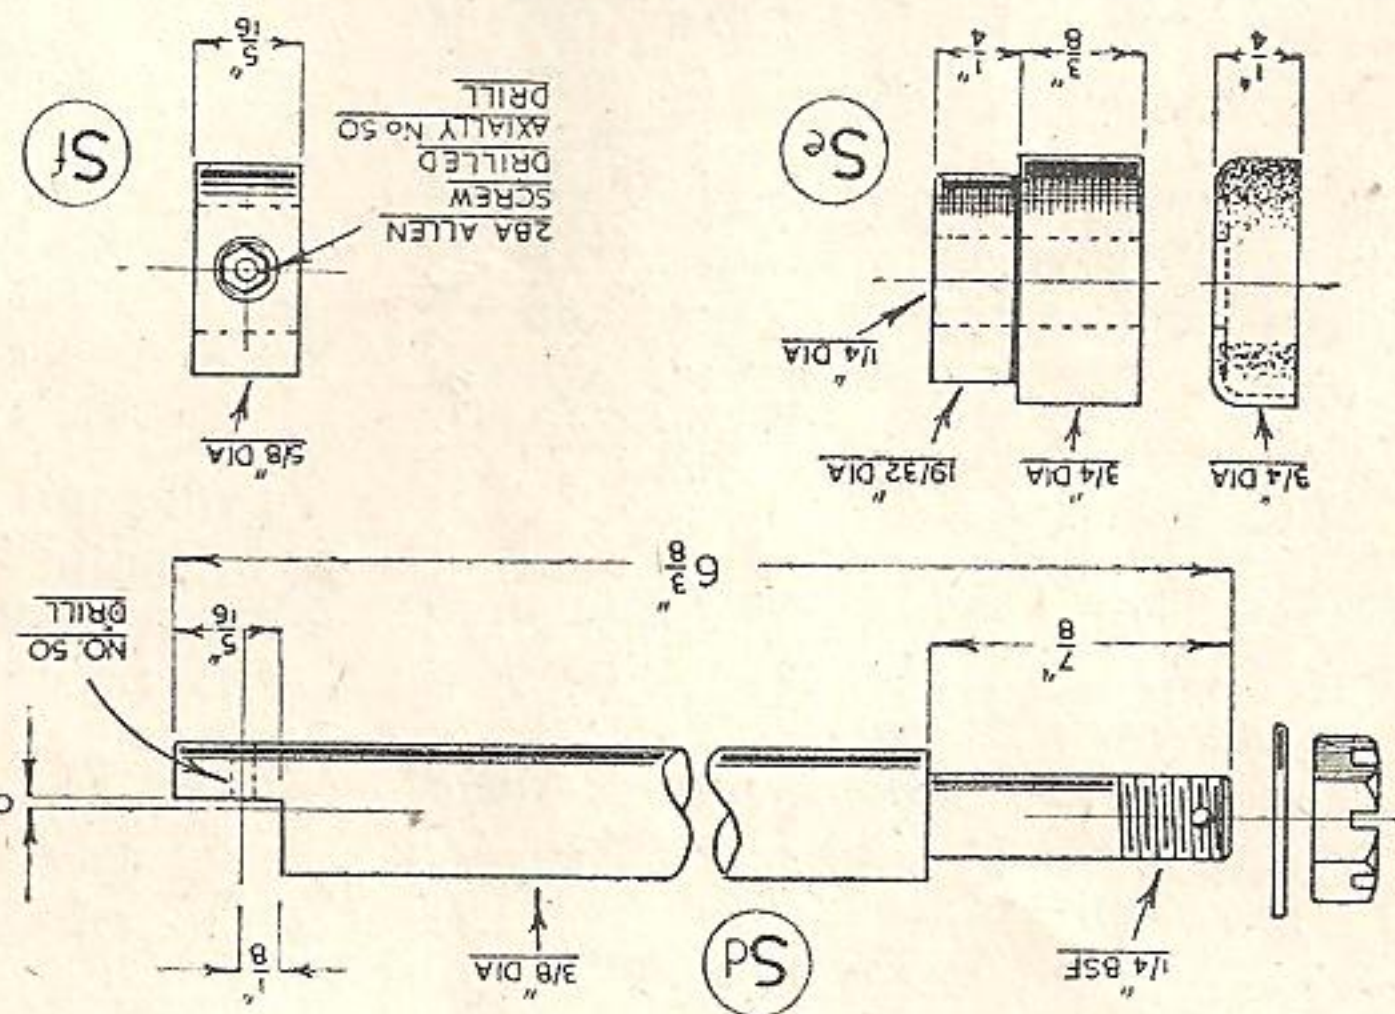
The piston-rod—Sd; the piston and cup-leather—Se; the saw blade clamp collar—Sf
